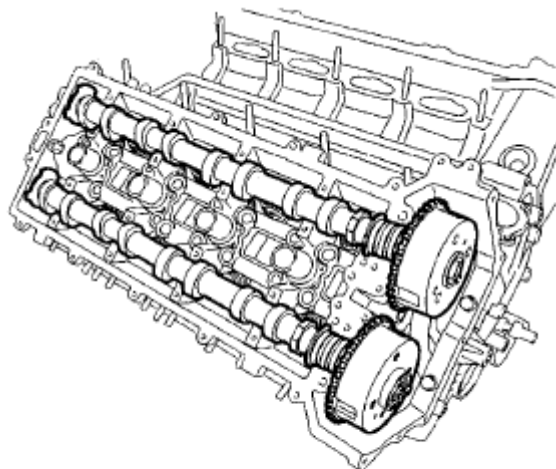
Identifying Hydraulic Lash Adjuster Assembly
